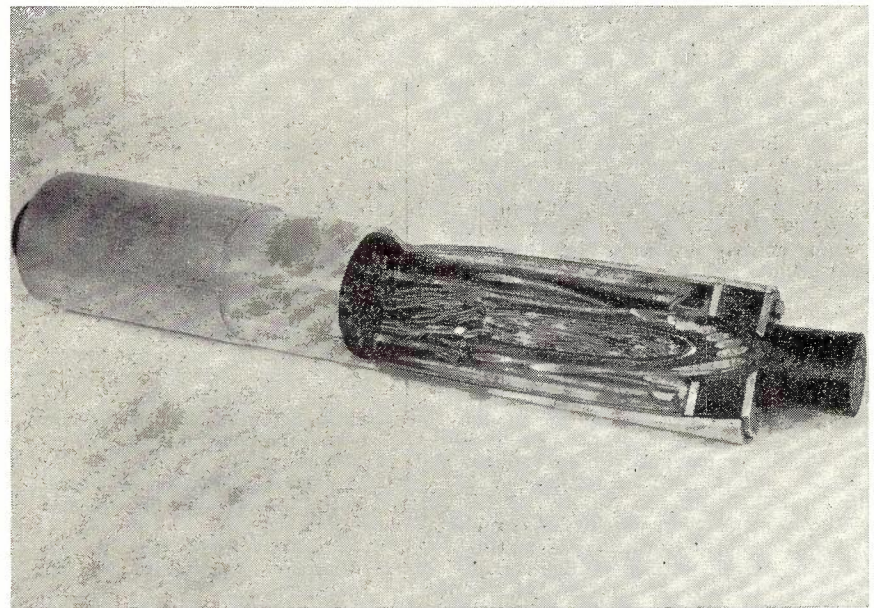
A cut-away section of the completed joint clearly showing the brass tube with polythene liner; encapsulation of the hot-twist conductor joints; penetration of the conductor and armour wires by the casting resin; the "stepped-down" polythene sheaths; the hooked ends of the armour wires around the hose clips; and the B.P.O. type expandable end seal.
